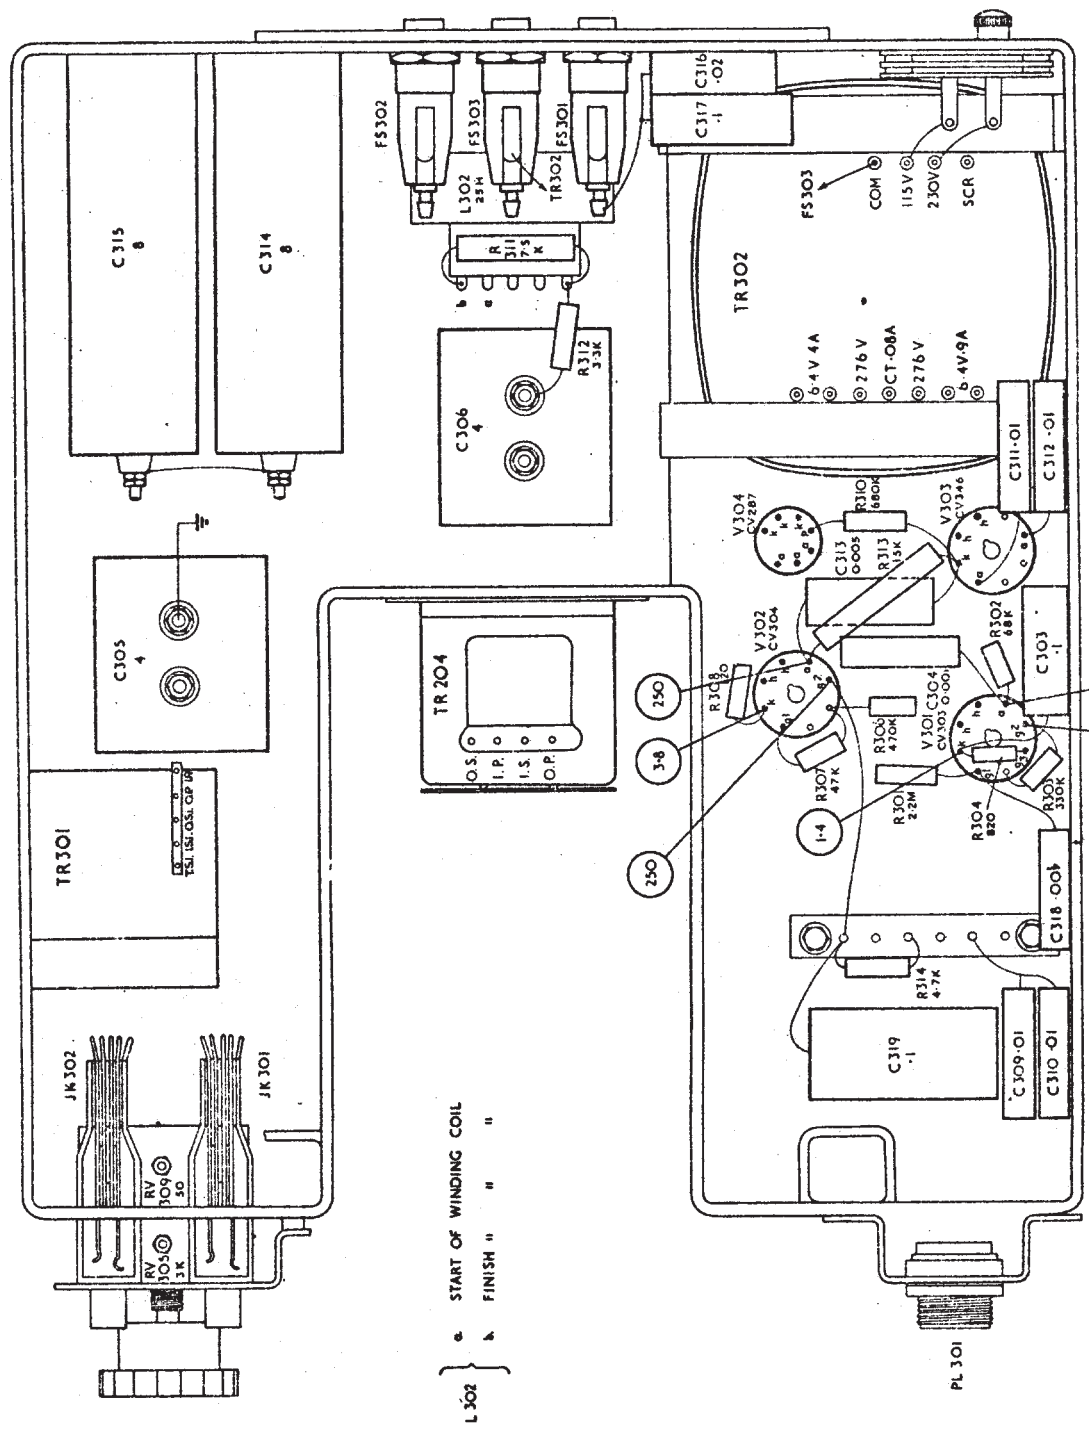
RECEIVER B40 A.P.57140 B/C A.F. & POWER UNIT. BOTTOM LAYOUT.
